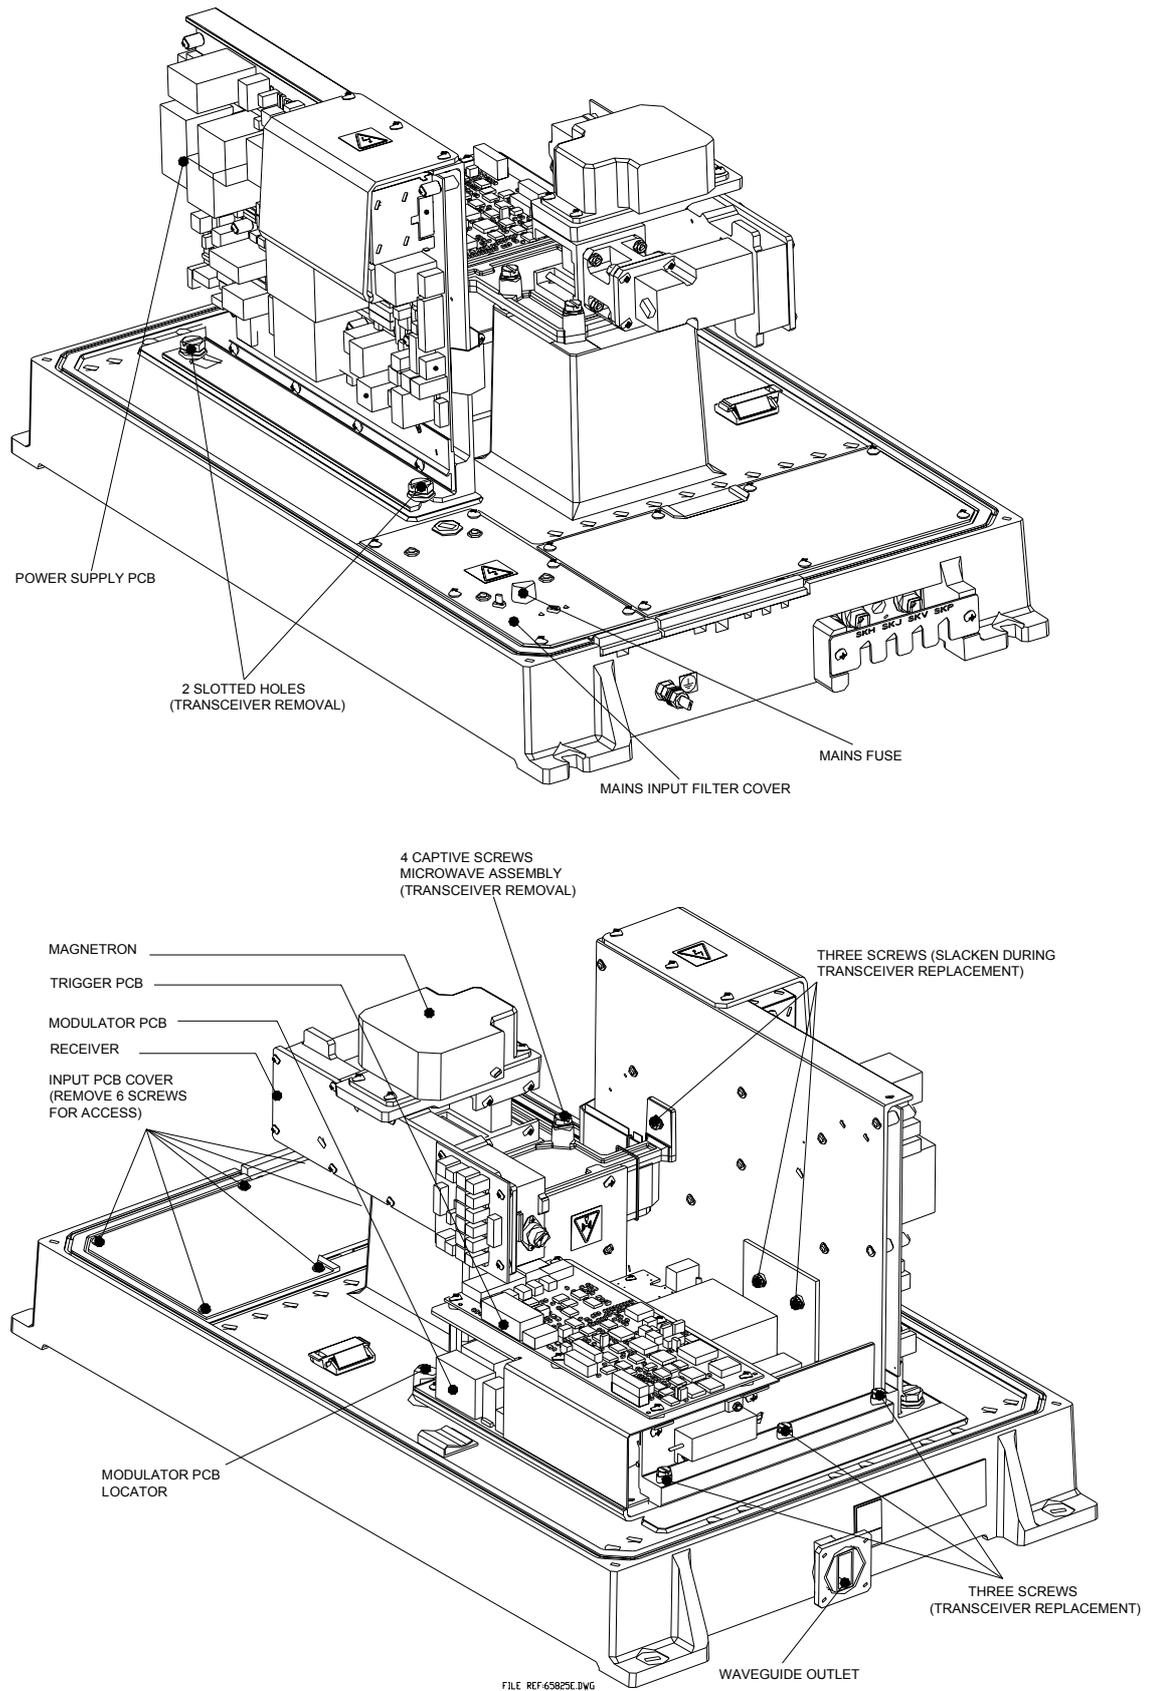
Bulkhead Transceiver – View with Cover Removed
